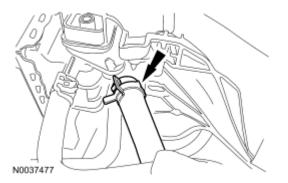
Locating Power Steering Cooler Tube Courtesy of FORD MOTOR CO.
